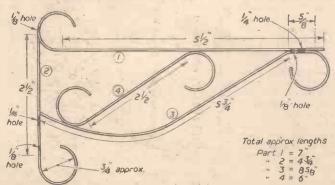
Showing the shape and dimensions of the brass strips for forming a bracket.
